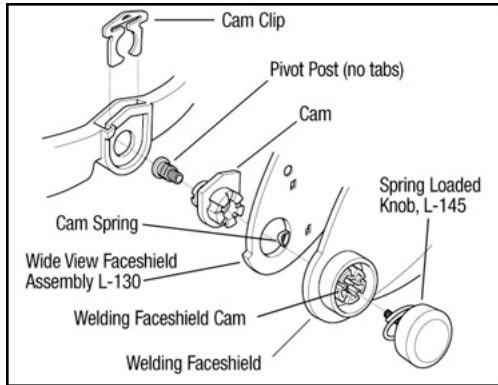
Removing and Attaching a Combination Faceshield (L-705SG and L-905SG)
